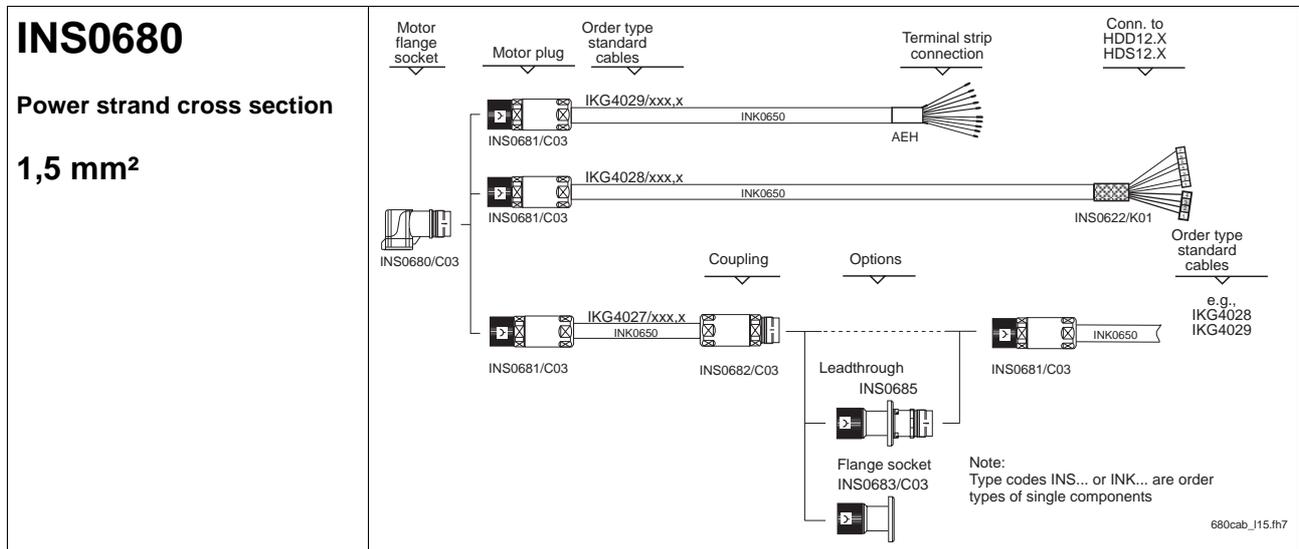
Motor power cable 1.5 mm<sup>2</sup> of flange socket INS0680
